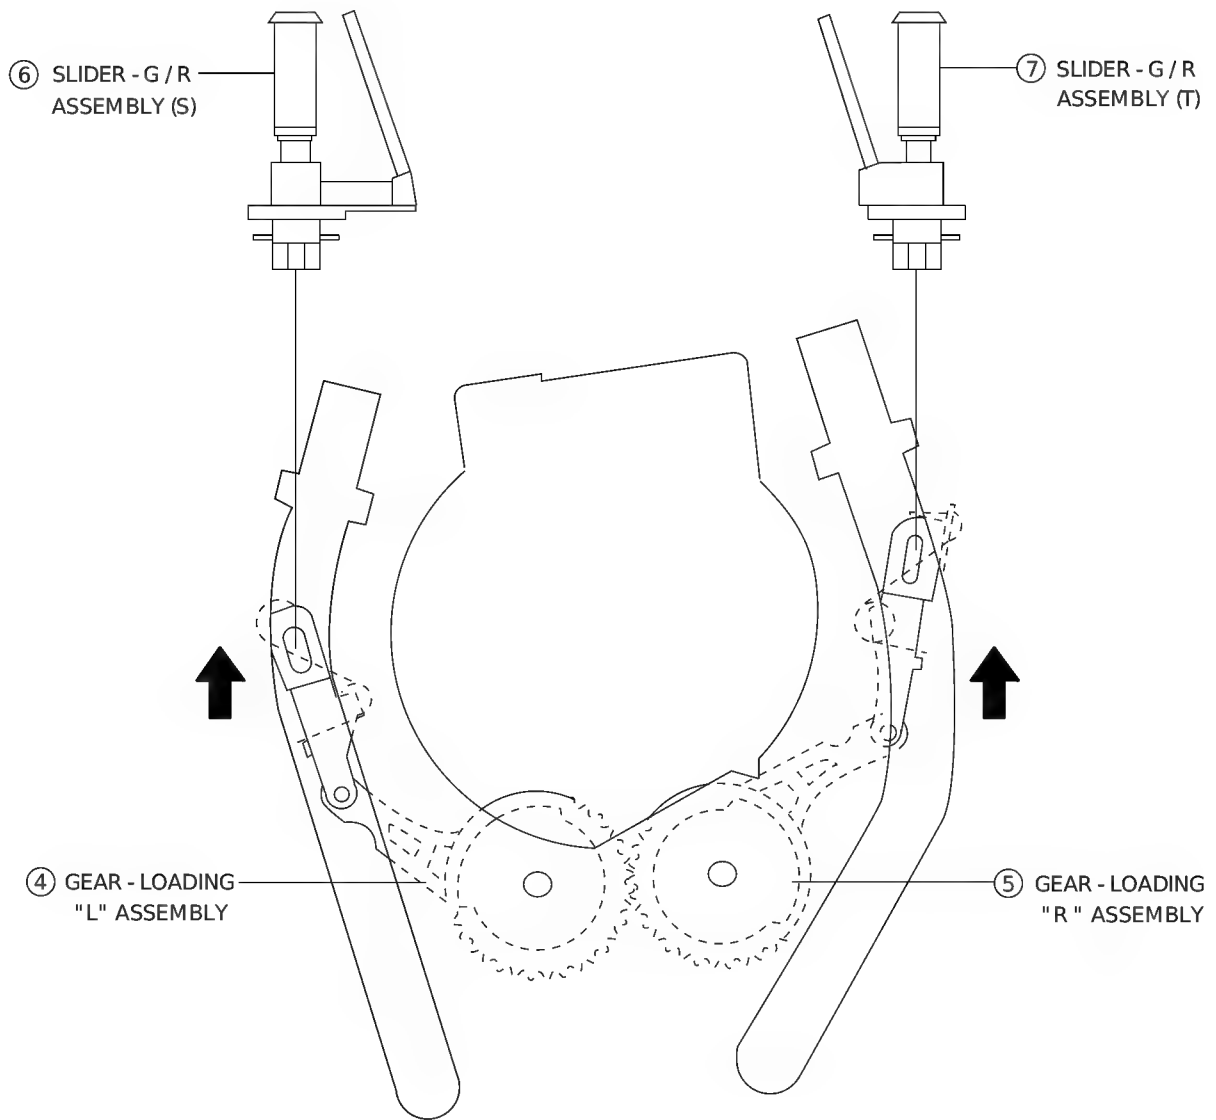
Assembly of Slide Guide Roller "S", "T" Ass'y
